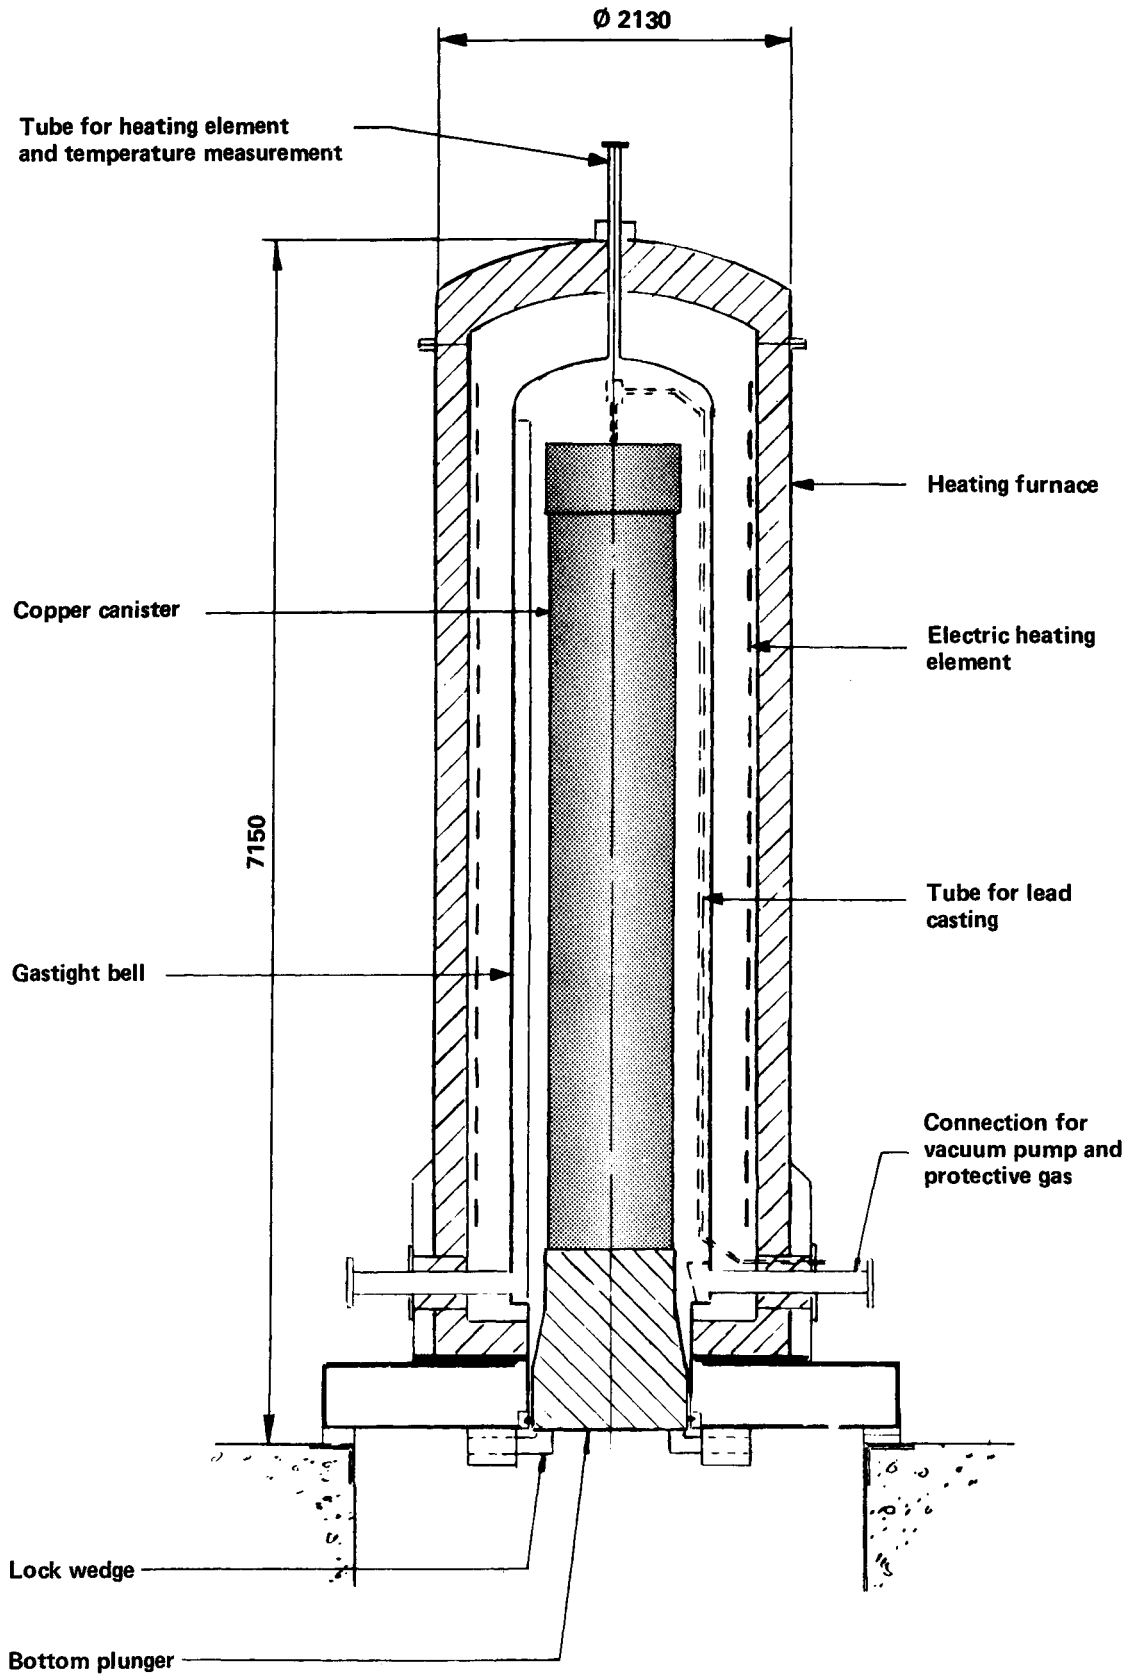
Longitudinal section of furnace for lead casting. Casting of lead into the canister takes place in a gastight bell surrounded by a heating furnace.
